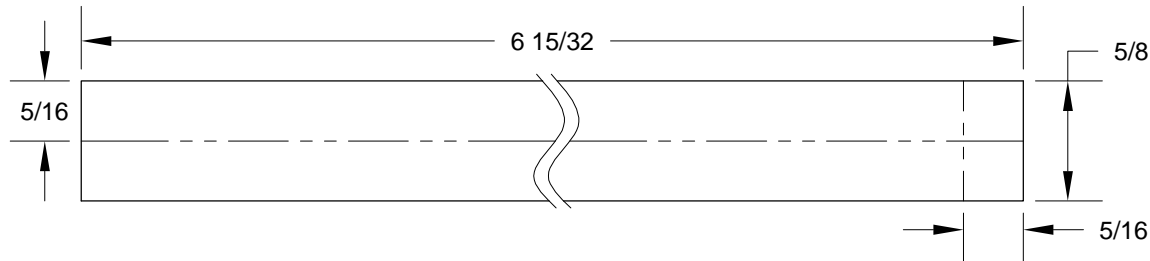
CUTTING AND MARKING THE W-1029D SPACER
